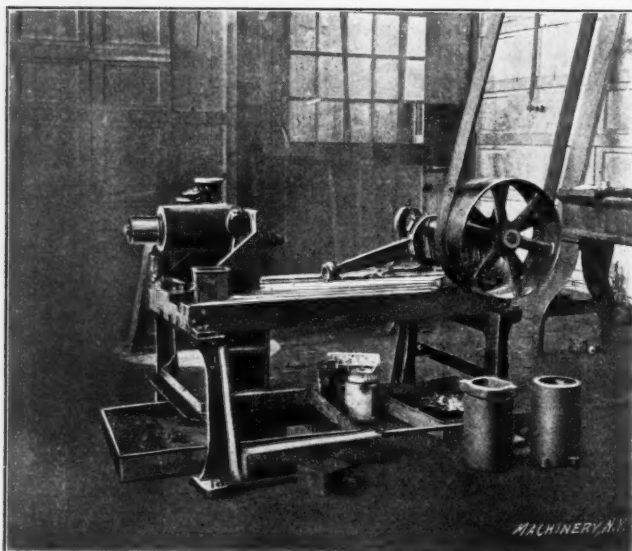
Piston Lapping Machine in Marmon Factory, showing Connecting-rod Disconnected at Ball-and-socket Joint
